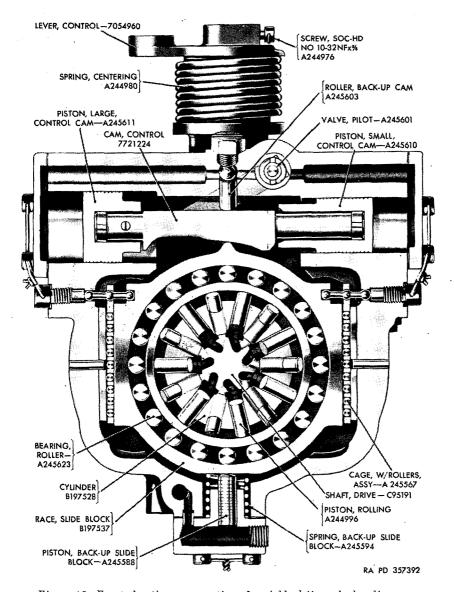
From elevation cross section of variable-delivery hydraulic pump.
